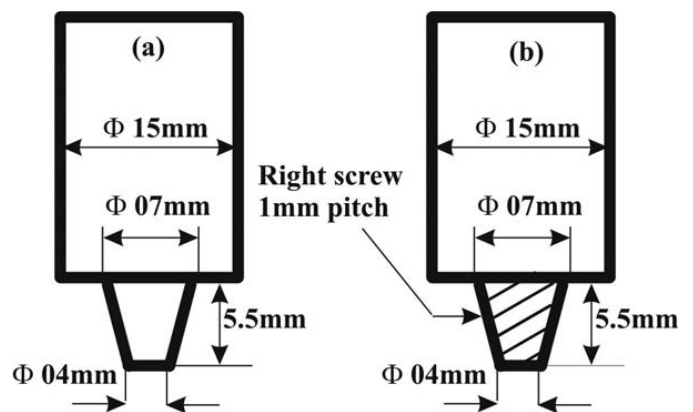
Schematic view of tool used: (a) Conical tool, (b) Conical threaded tool.
